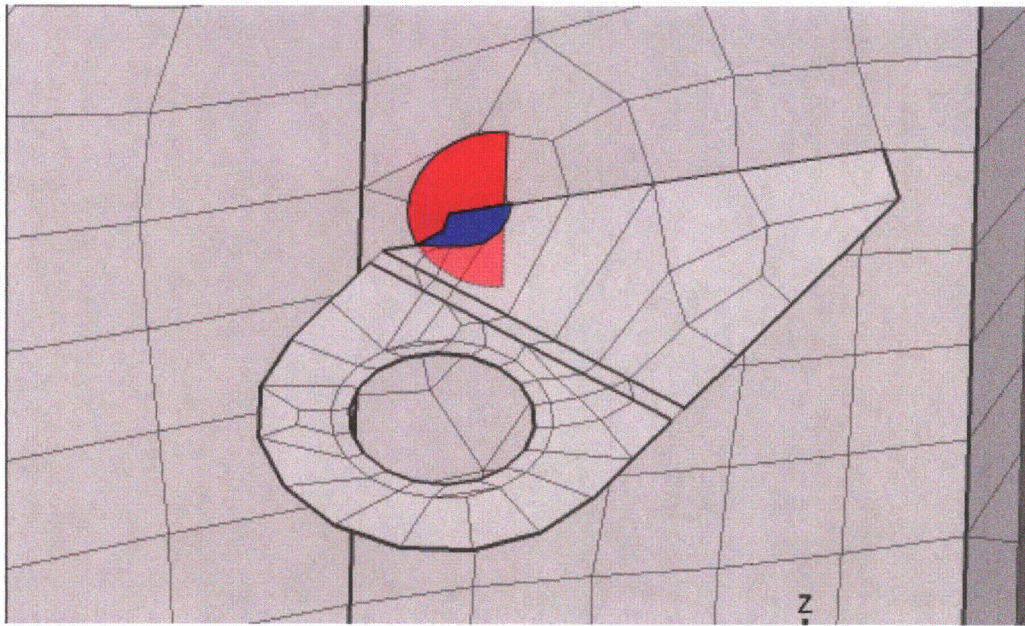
Reinforcement concept 2: Partial reinforcement – semi-circular plate one side plate (red) and reinforcement of re-entrant corner on support bracket (blue)
